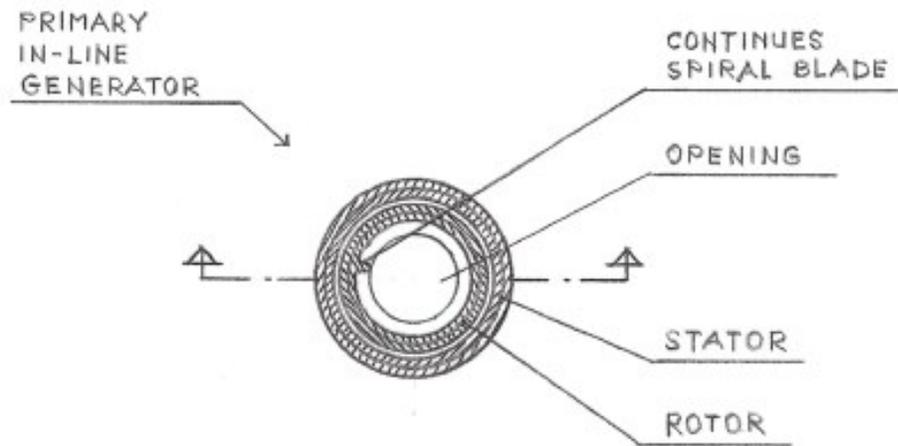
Cross-sectional Frontal View of the Primary and Secondary In-Line-Pump / Generator
